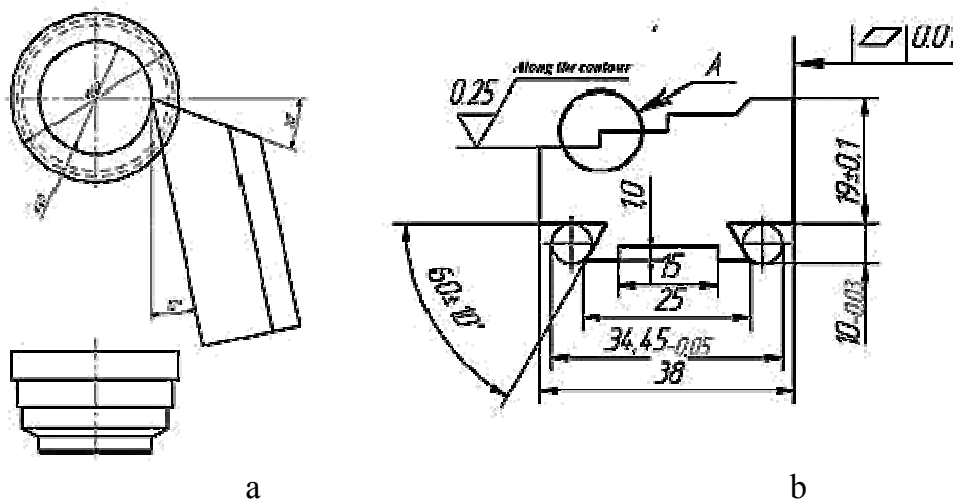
Shaped turning: a – scheme of cutting; b – mounting tool
